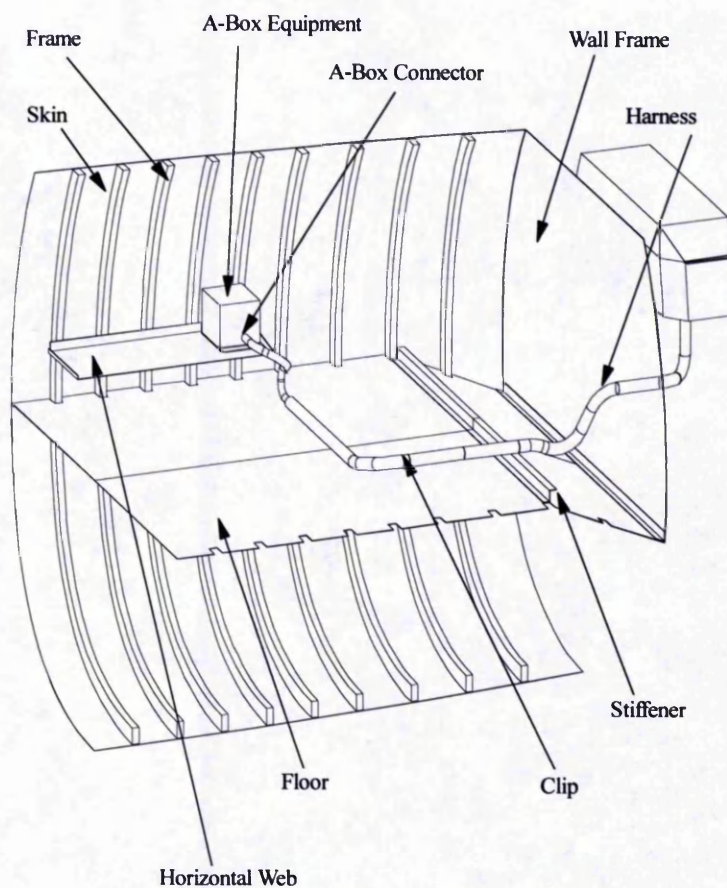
Typical Assembly with Structural Parts, Equipment and Wiring Installation
